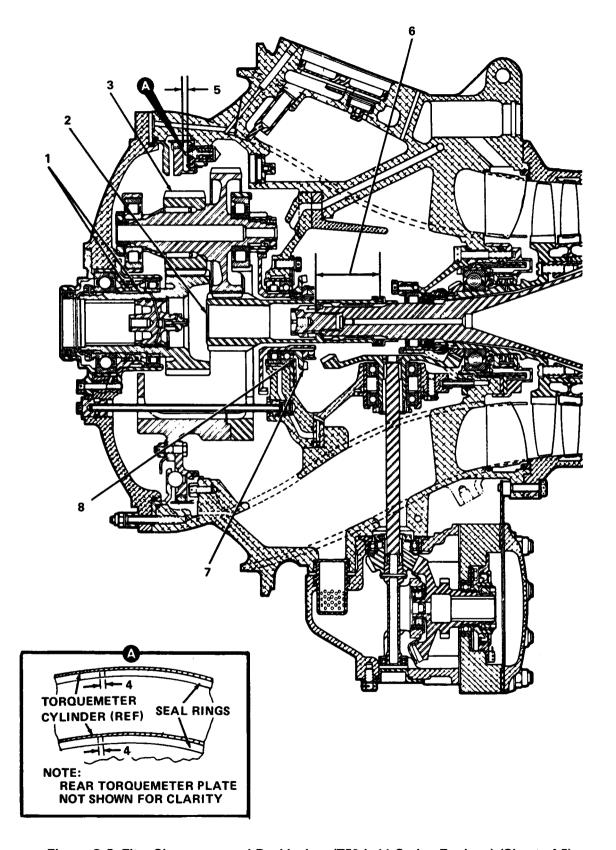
Fits, Clearances and Backlashes (T53-L-11 Series Engines) (Sheet of 5)
